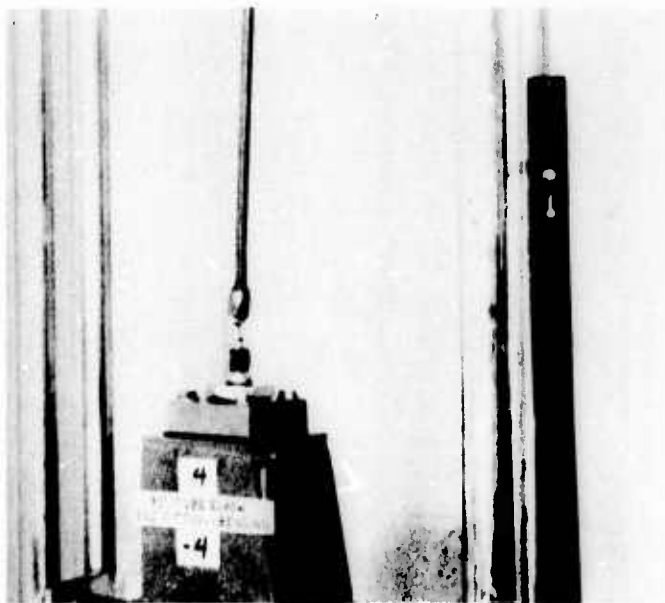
Typical Tube Elbow End-Fitting Combination Following Bending Load Application.
